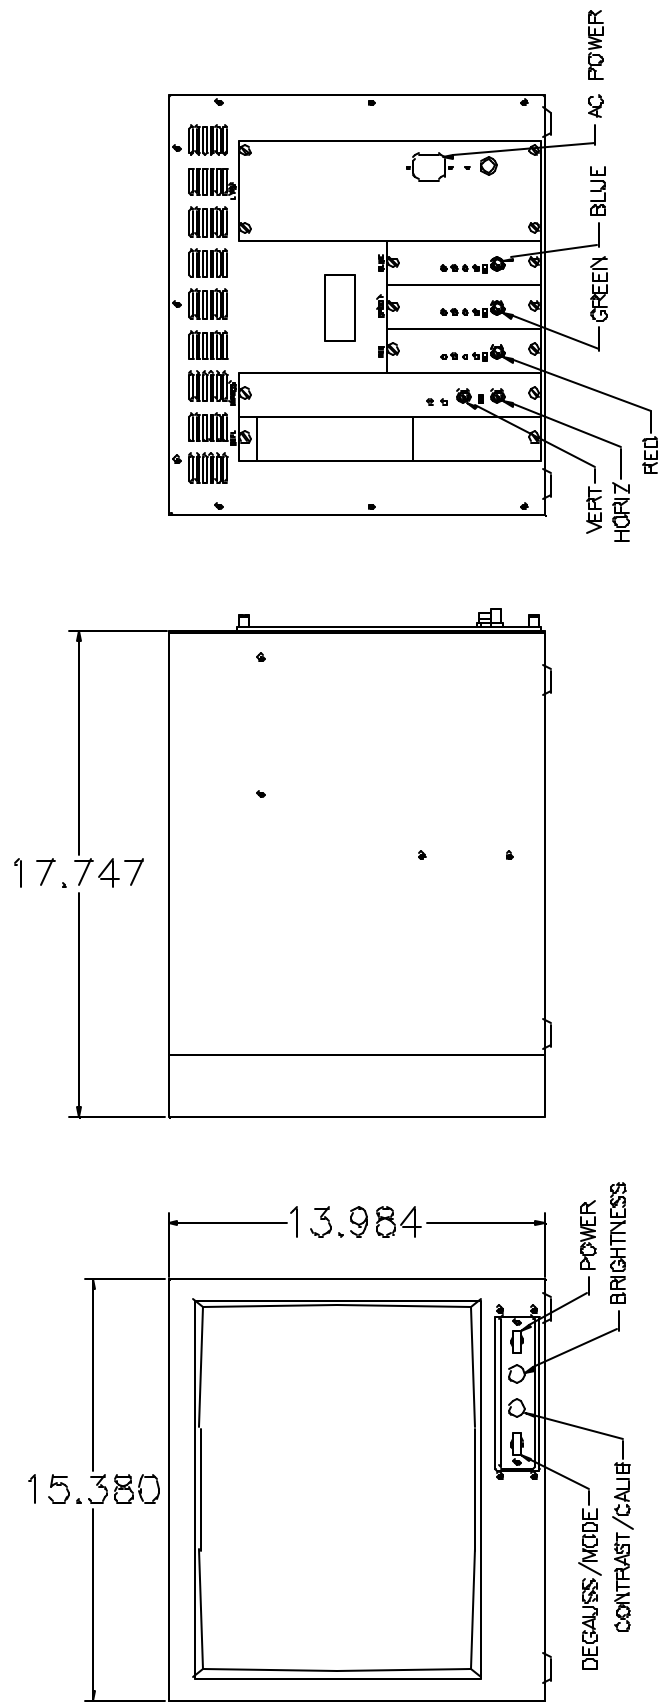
MODEL 6115 & 6116 OUTLINE DRAWING
